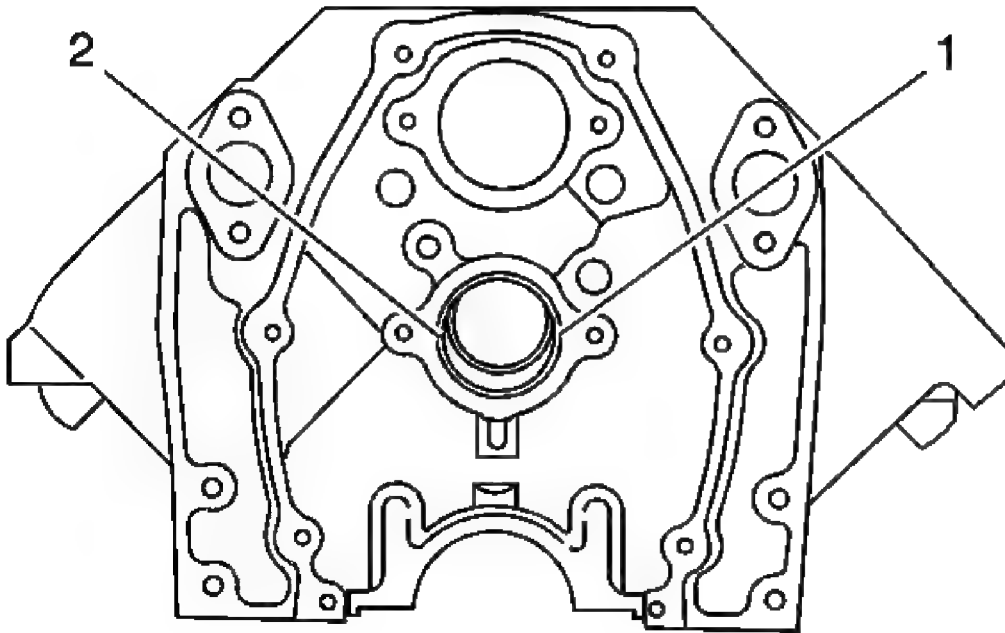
Locating Proper Positioning Of Camshaft Bearing Lubrication Holes
